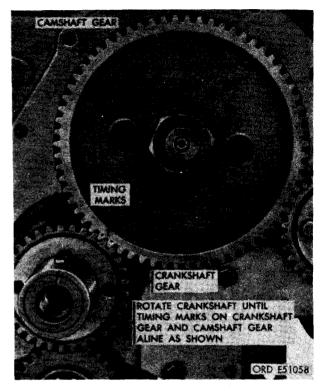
CRANKSHAFT AND CAM-SHAFT GEAR TIMING MARKS ALINED.
